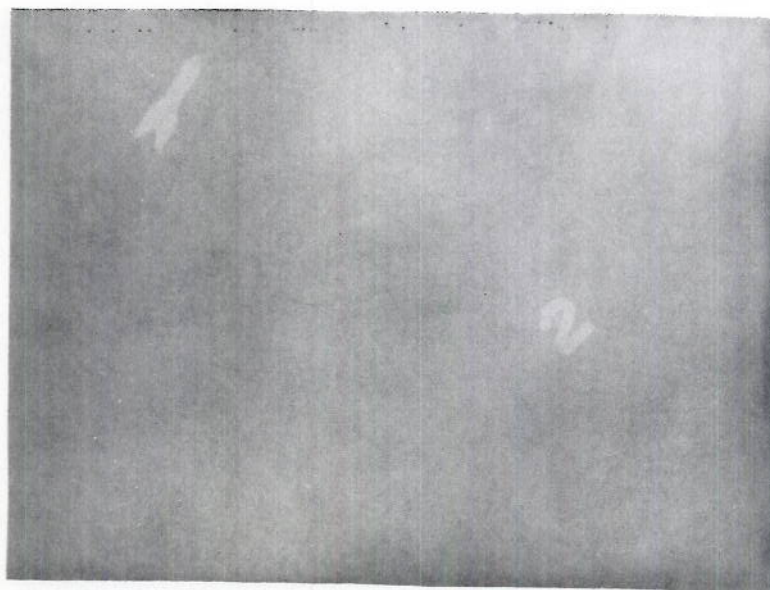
RADIOGRAPH OF CENTER SECTION OF CASTING
